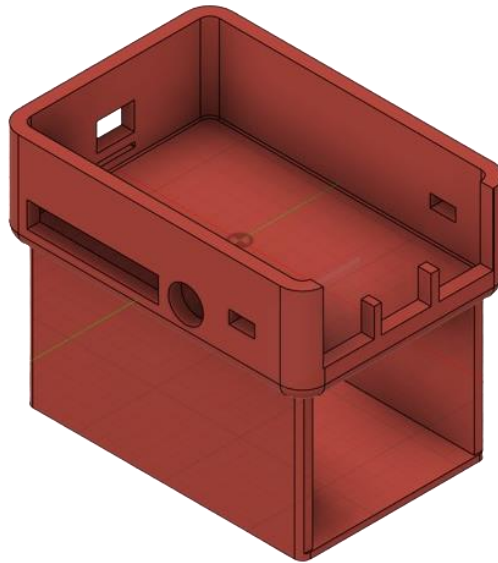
Assembled Top & Bottom Test Print (Demonstration)
